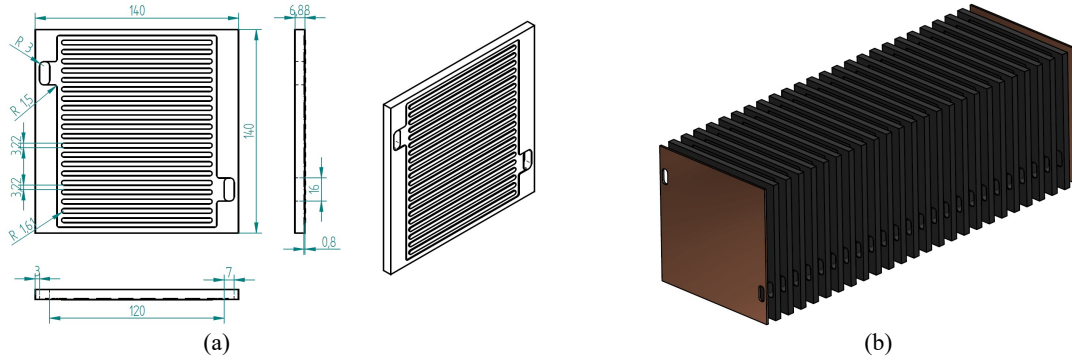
(a) Bipolar plate elevation, profile, plan and isometric views and (b) the FC stack assembly.
